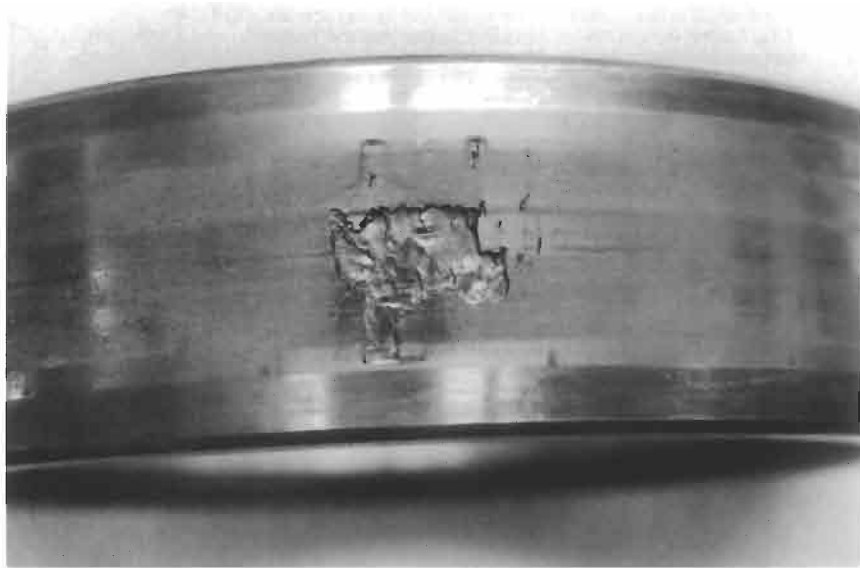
Severe spalling on the inner ring of a thrust bearing.
